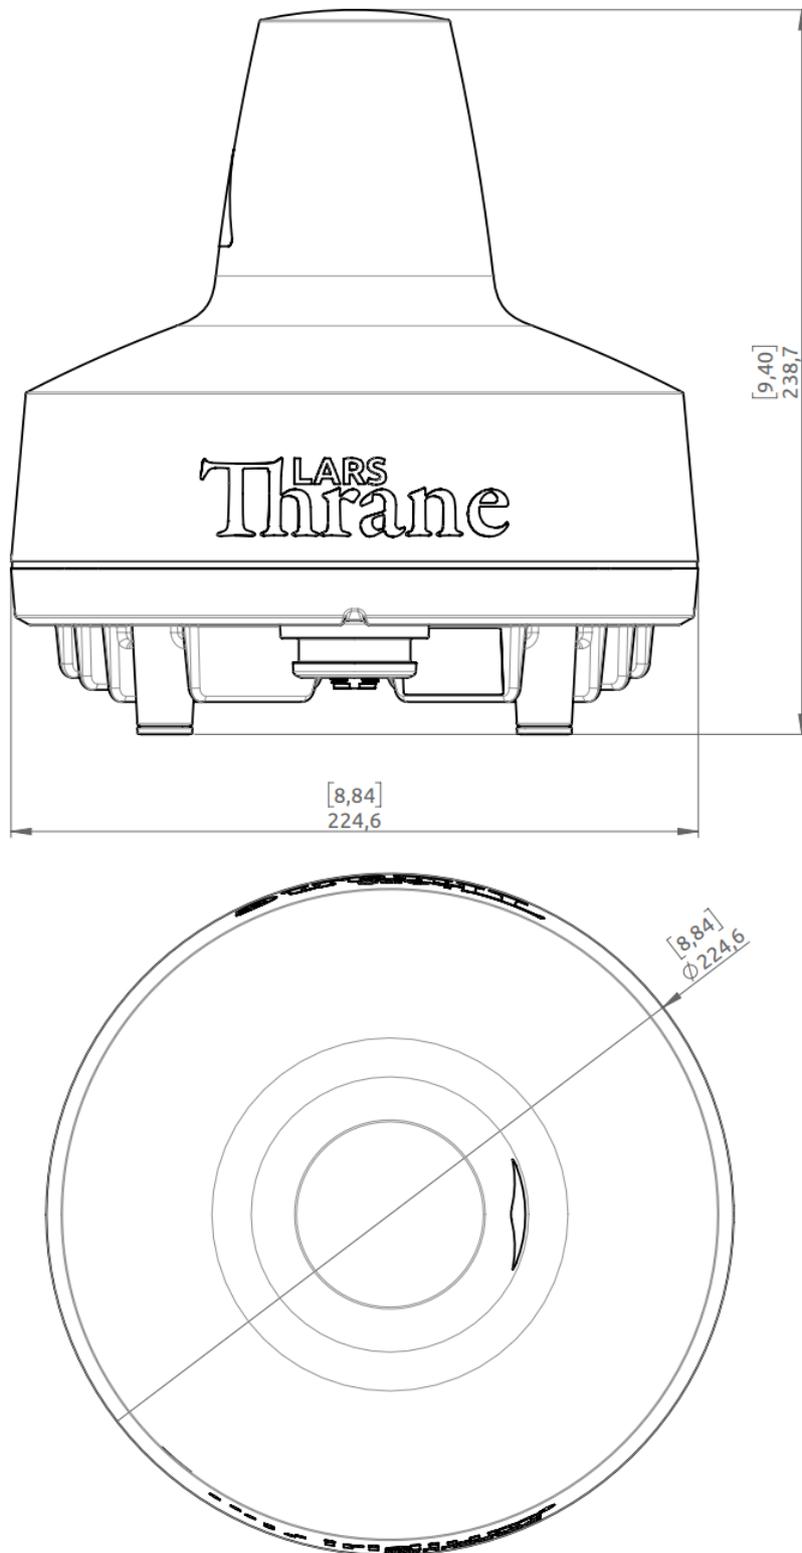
Outline Drawing: LT-4230 Antenna Unit
